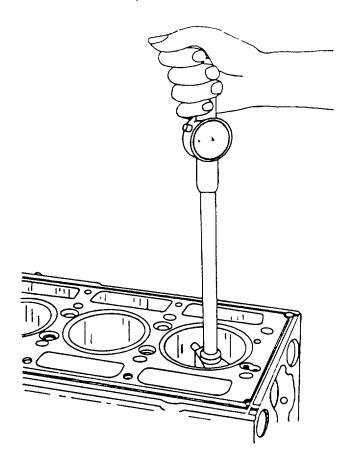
Checking Bore of Cylinder Liner Using Tool J5347-01.
